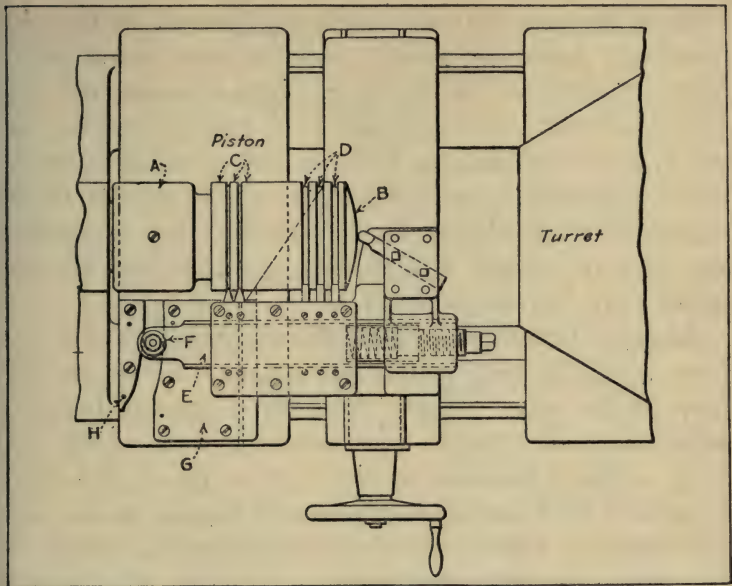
PISTON FORMING AND GROOVING ATTACHMENT
